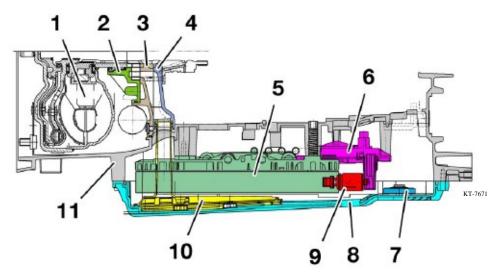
GA6HP26Z, mechatronics module (sectional view)
